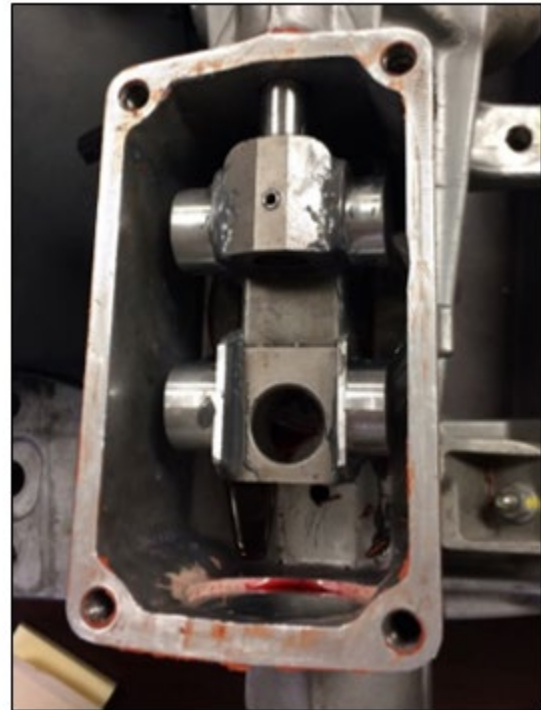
Final Assembly of Magnets onto Shifting Block
